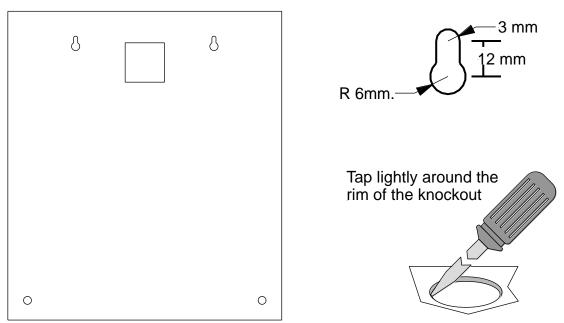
Example SP1 Back Pan Mounting Hole & Removing Knockouts
